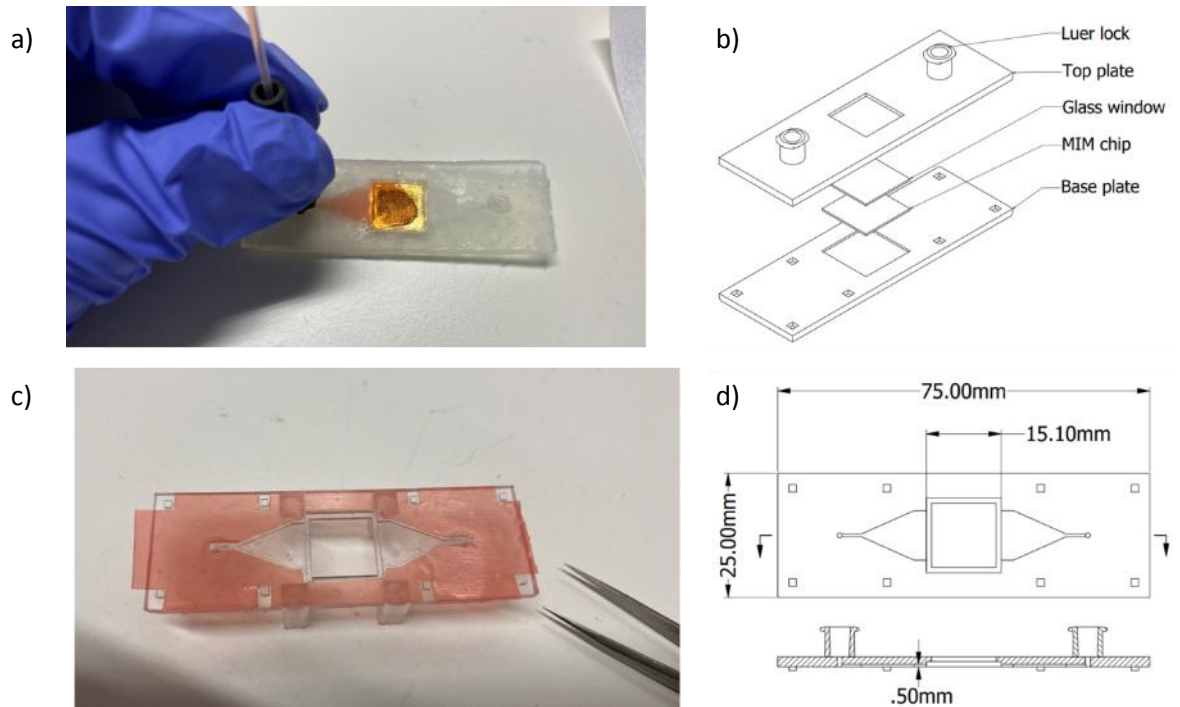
Two-part microfluidic assembly. a) Red food dye flowing through the fluidic assembly. b) Assembly constituent parts in an expanded view. c) Double-sided tape applied to glue the two 3D printed components together and d) details of the top plate showing channels, device width, length and minimum channel dimension.
